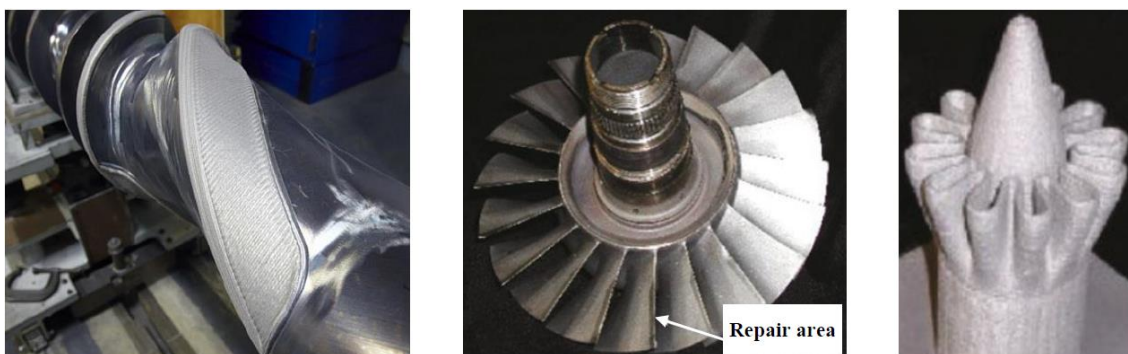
Examples of using DED technology for (a) coating, (b) blisk repair, (c) manufacturing nozzle for gas turbine exhaust (Courtesy of OPTOMECH [7]).
